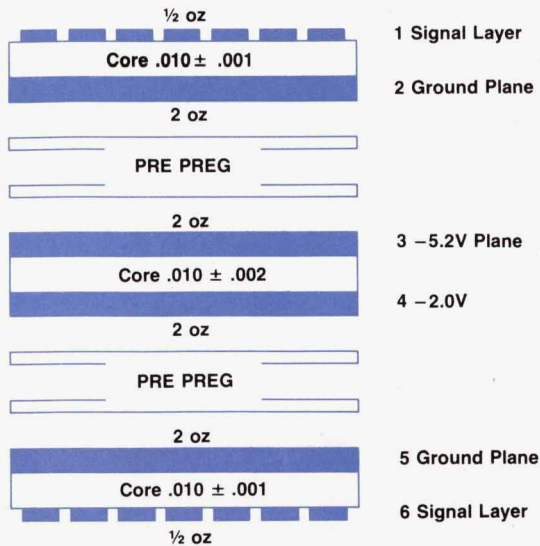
Typical HP 3000 Series 64 printed circuit board construction. Dimensions are in inches.
